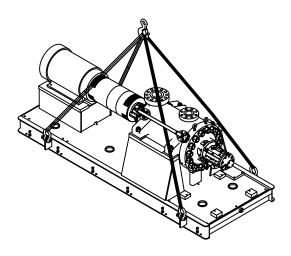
Example of the proper lifting method for baseplate-mounted units with a driver
